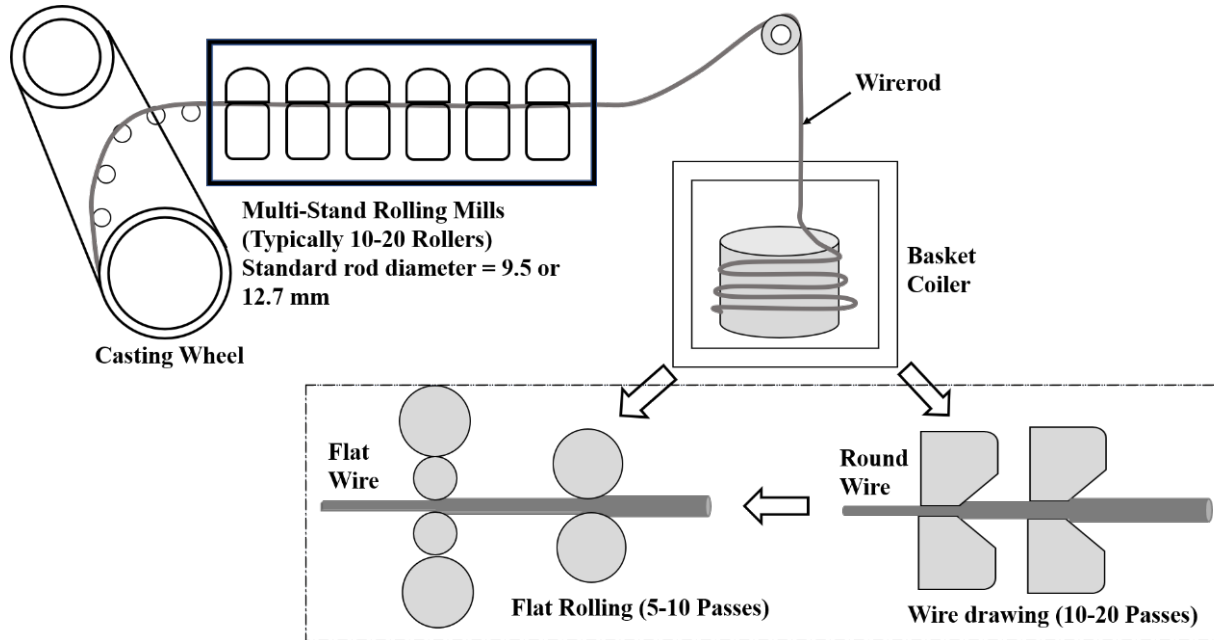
Schematic of general the layout of continuous casting and rolling of aluminum rod (adapted based on [112])
